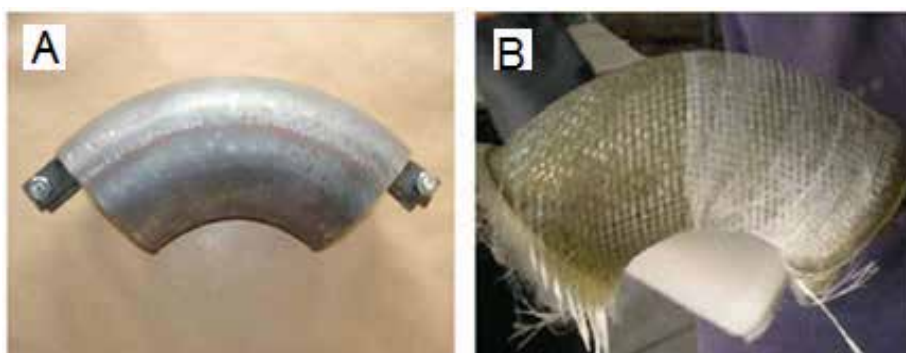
(A) Steel mandrel used and (B) example of the fabric wrapping step
